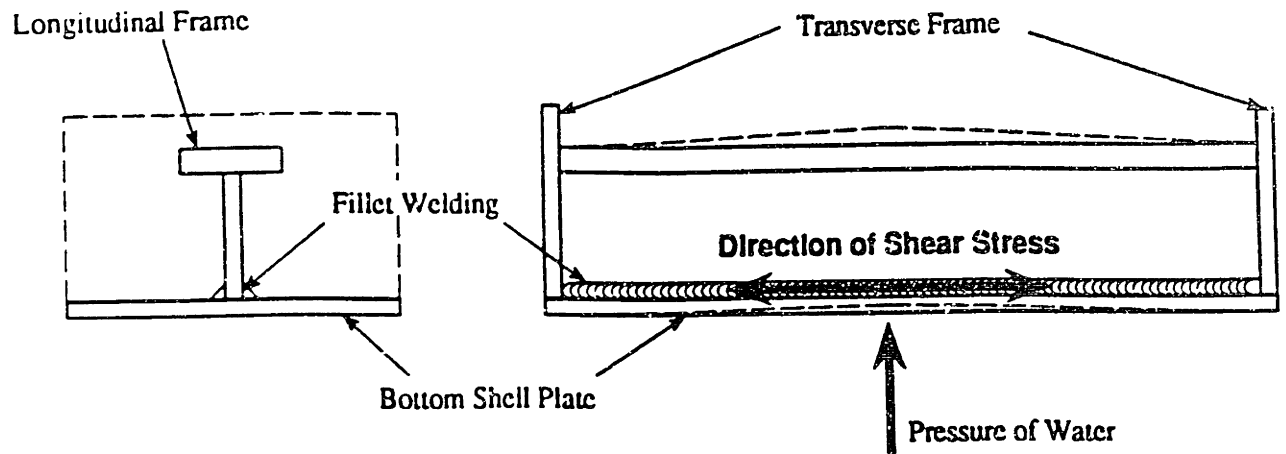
Schematic Drawing of Stress at Weld Joint for Present Design of Fillet Welds
